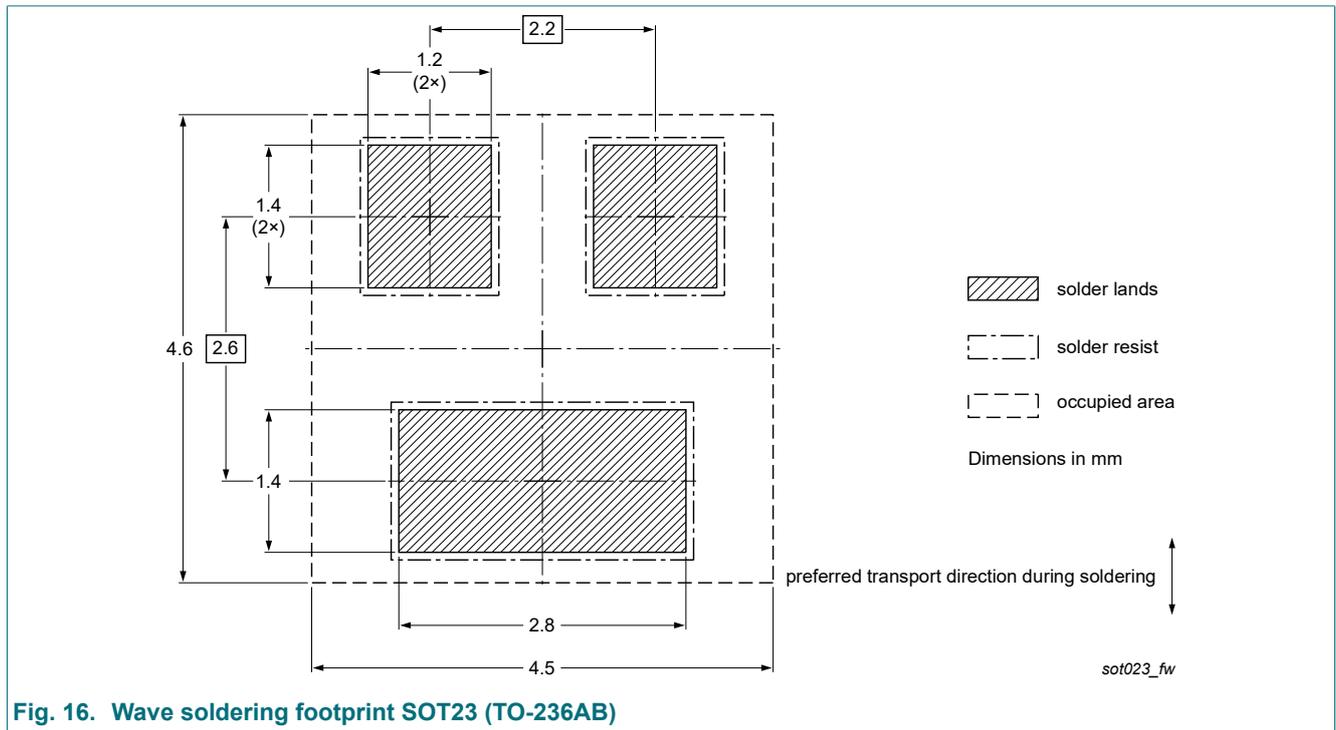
Wave soldering footprint SOT23 (TO-236AB)
